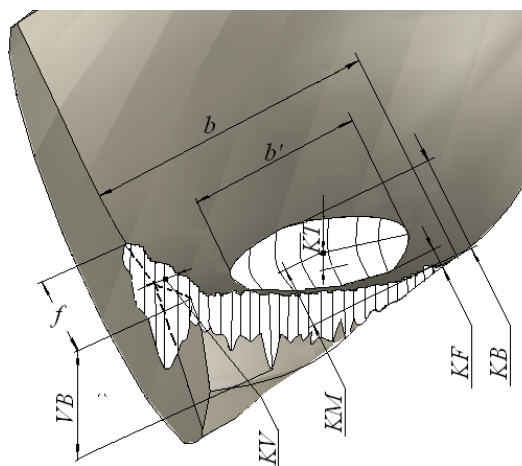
Scheme of the wear for single flute end mill cutters [1], [2].
